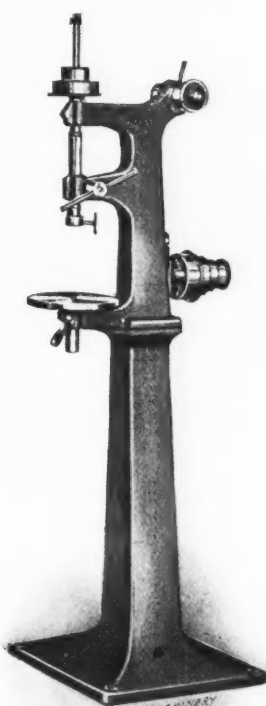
No. 28 Column Drill equipped with Lever Feed
